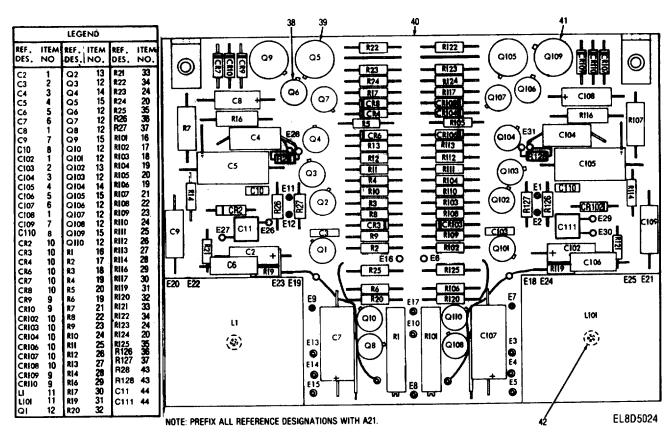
Printed Circuit Board Assembly A21 (Sheet 1 of 3) Serial Number 8015-369-24 To 8148-807-24.
